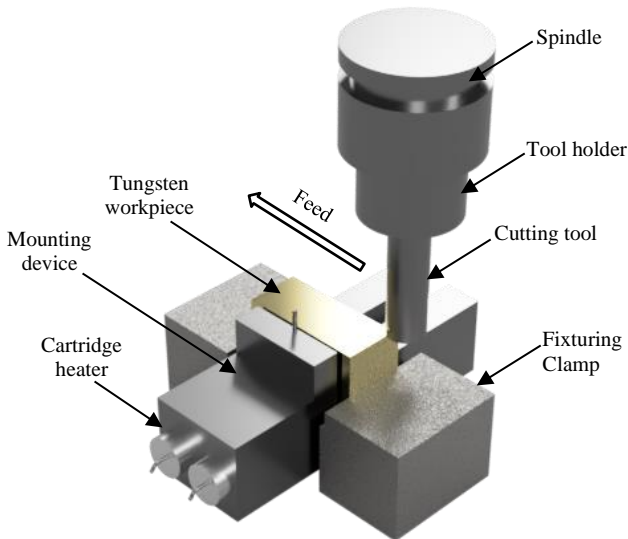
Experimental set-up showing the mounting device and cartridge heaters used for preheating
